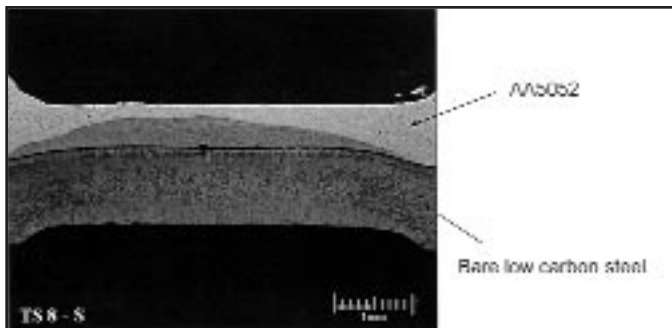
Cross section of 1-mm AA5052 to 0.8-mm bare low-carbon steel spot weld.
